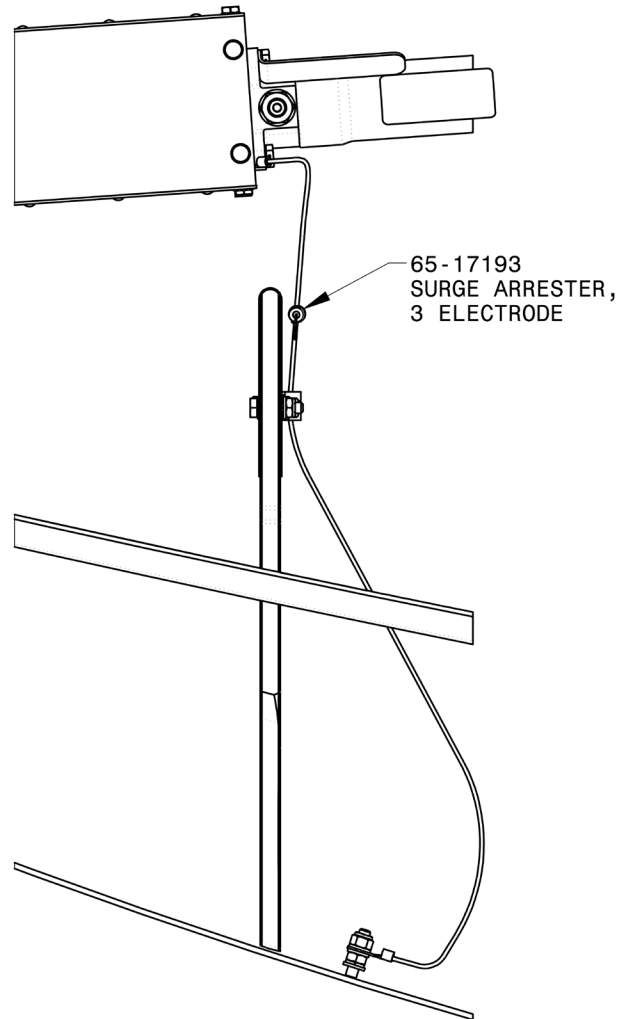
Locations for LSP Bonding Jumper Assemblies 6650
